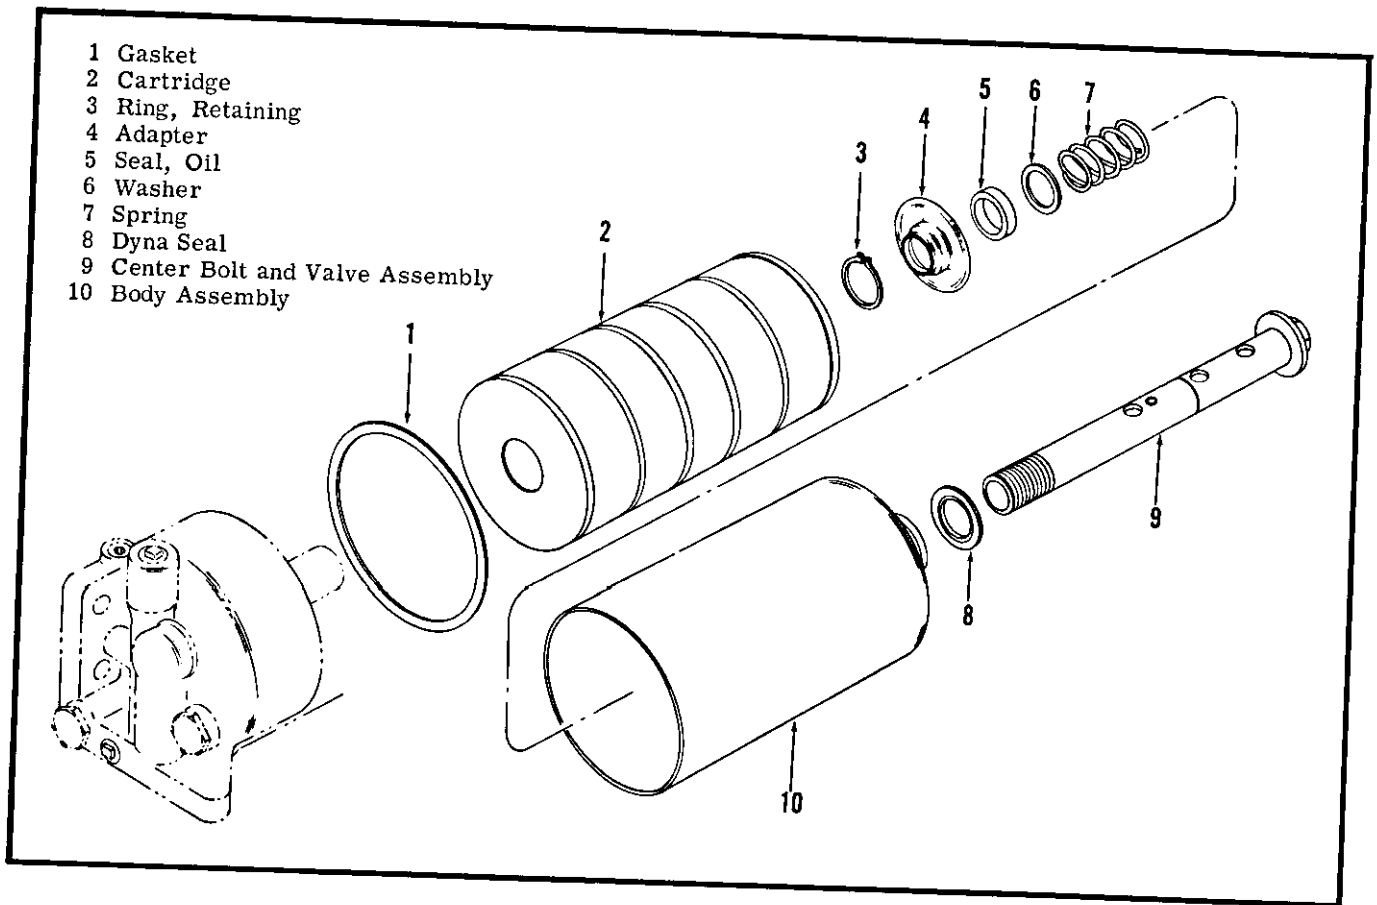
Engine Oil Filter, Disassembly and Reassembly
